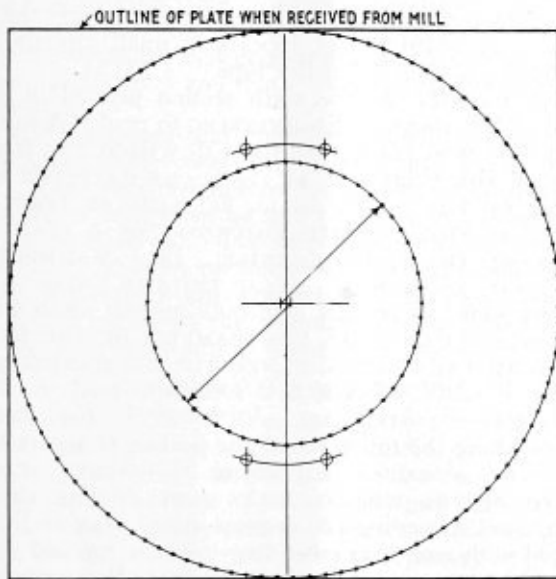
Layout of pattern dome liner—showing tack holes—ready for rolling and then bolting to the boiler for marking off the remaining rivet holes
